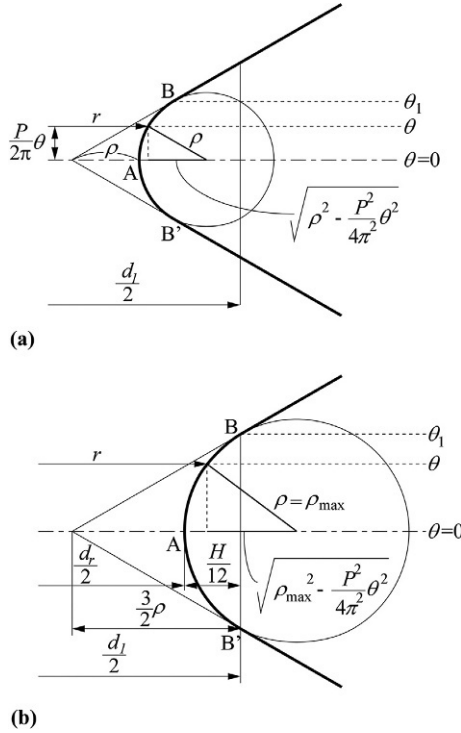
Detailed geometry around the thread root. (A) Details of thread root geometry and (B) in case of $\rho = \rho_{\max}$.
